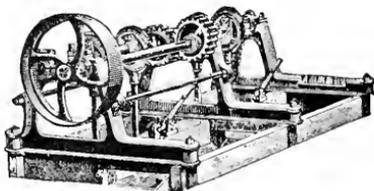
ELLIPTIC GEARING FOR JIGGERS.
